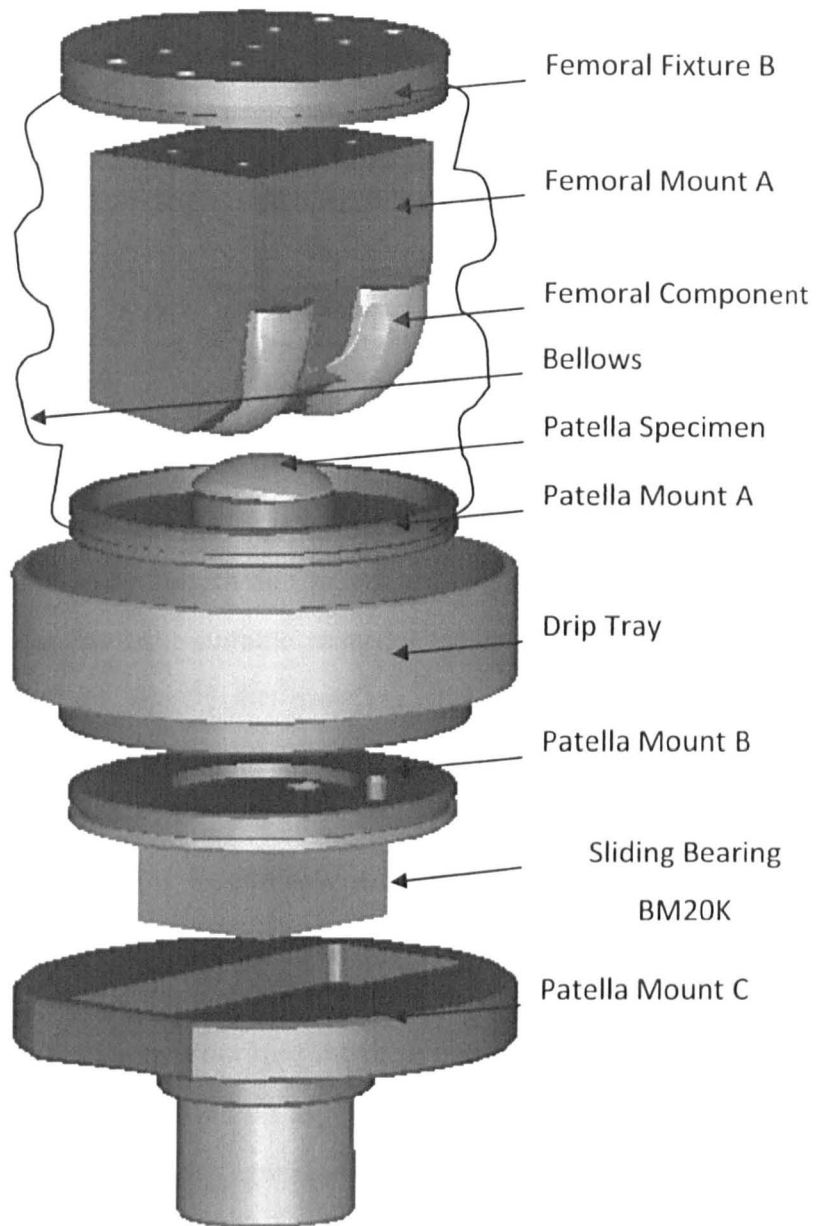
Assembly of mounting and fixtures required for converting Leeds ProSim knee simulator to patella femoral joint.
